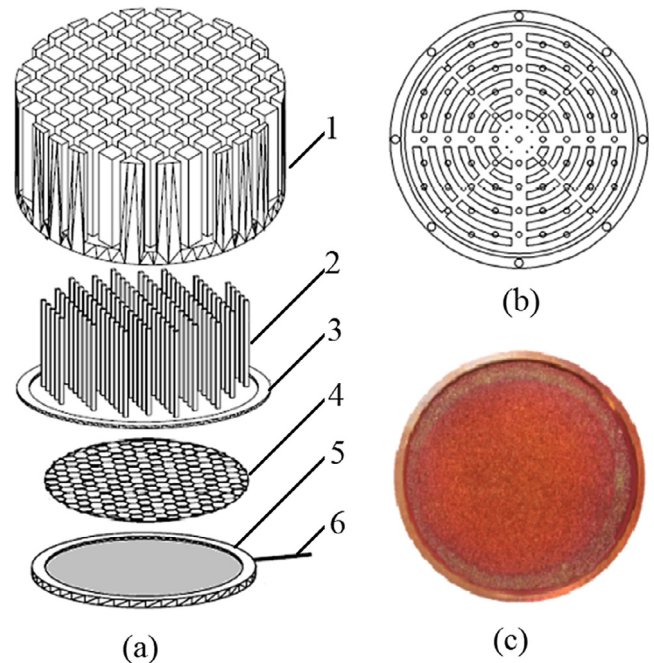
Schematic representation of integrated flat heat pipe: (a) parts of the IFHP (1. heat sink; 2. copper foam bars; 3. sealing piece; 4. metal foam layer; 5. copper substrate; 6. filling tube); (b) bottom structure of fin heat sink; (c) copper foam layer wick sintered on the evaporator bottom plate.
